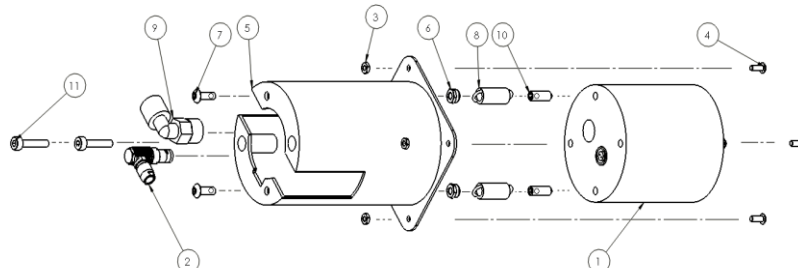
Cup subassembly exploded view. 1: probe; 2: *Lemo FGG.0B.302.CLAD52Z* plug; 3: nuts to fix the cup; 4: screws to fix the cup; 5: cup; 6: nuts to fix the top screws; 7: top screws to fix the springs; 9: L air connector; 10: set screws to fix the springs.
